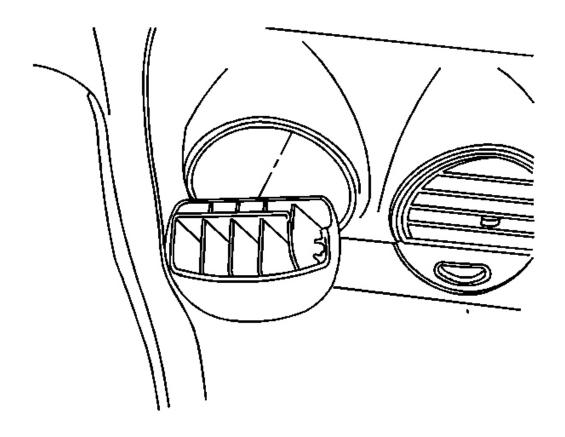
Removing/Installing Air Outlet Courtesy of GENERAL MOTORS CORP.
